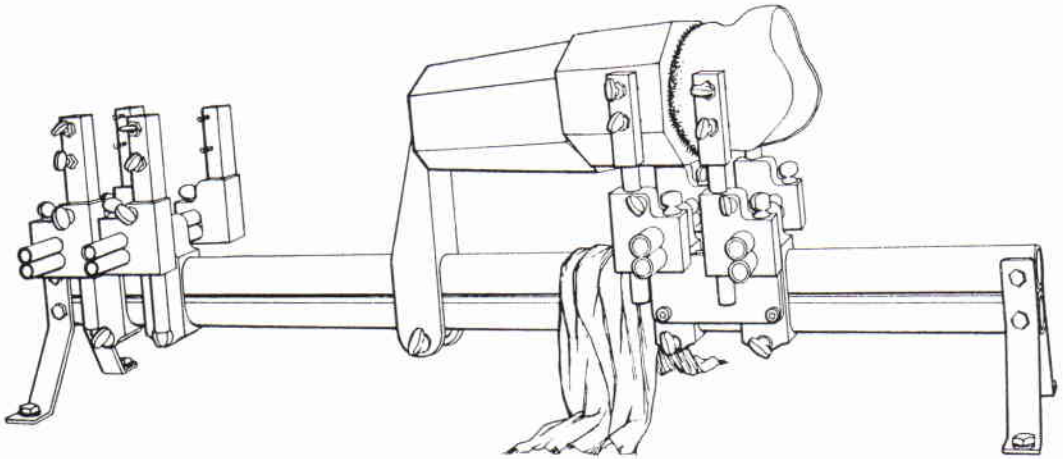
Shank and socket block glued together in relationship established by jig fixtures. Dripping glue is caught by waste thrown over jig base.
